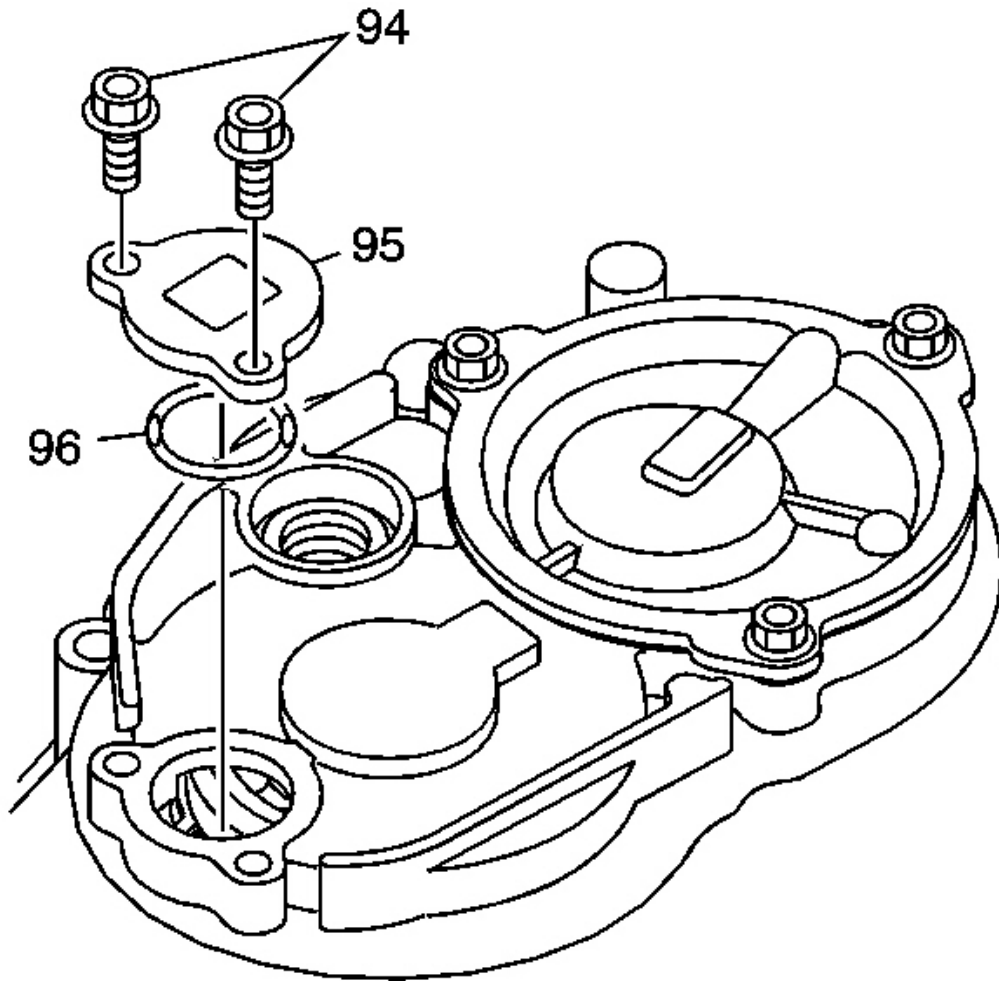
Output Shaft Rear Access Cover, Bolts, O-Ring Seal & Transmission Case
